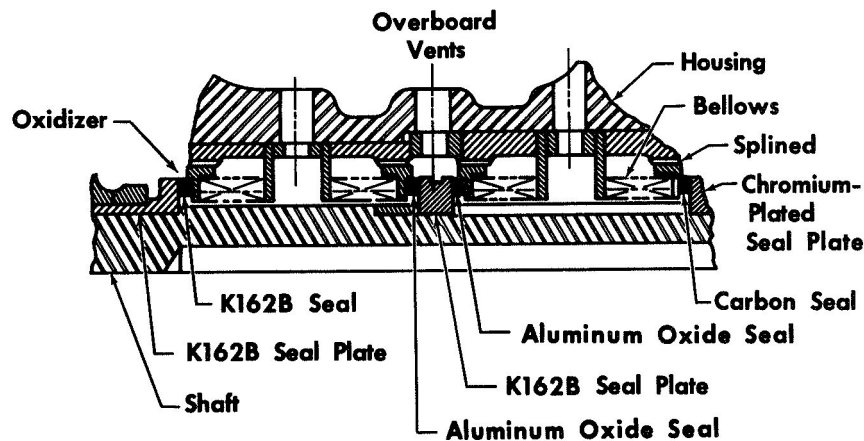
Oxidizer Pump Shaft Seal Package GS 11183B
